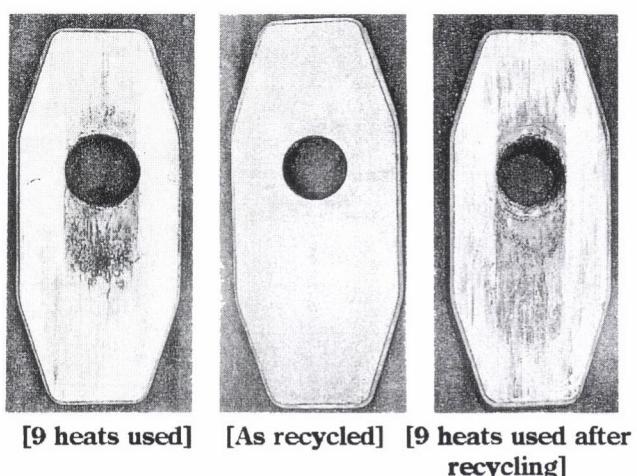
Photograph of recycled SG plate for ladle (appearance of sliding surfaces).
